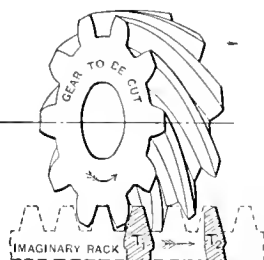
Shaper Tools representing Teeth of Imaginary Rack, Operating on the Molding-Generating Principle to generate Teeth in a Helical Gear; compare with Fig. 8.
